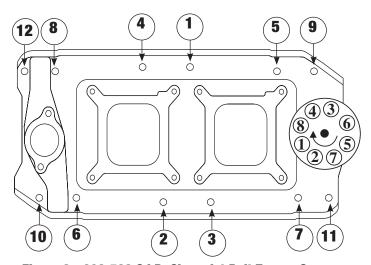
396-582 C.I.D. Chevrolet Bolt Torque Sequence
